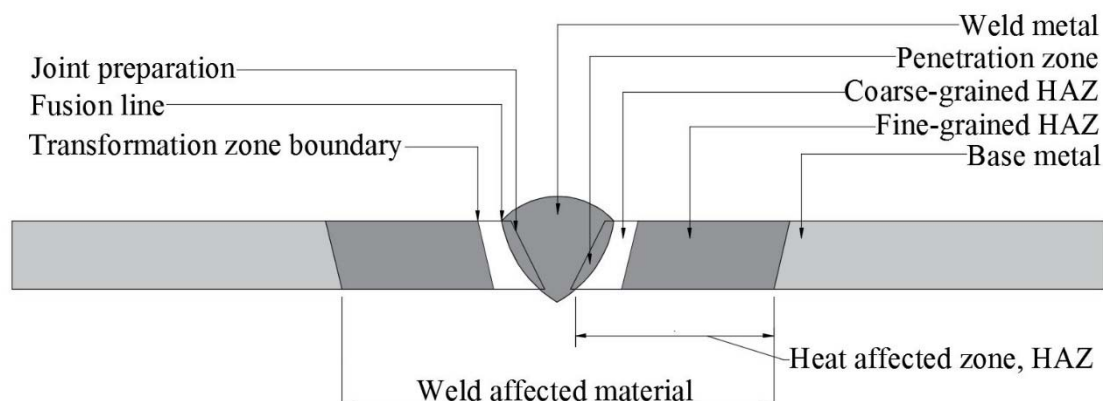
Heat affected zone of a weld (Lancaster, 1997)
